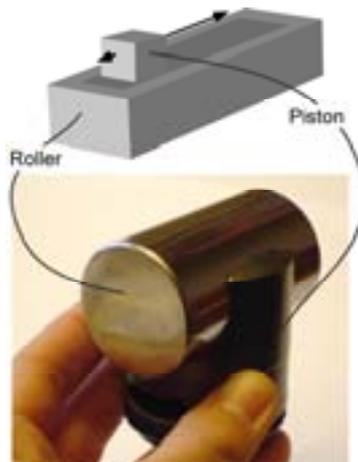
The upper smaller piston part is sliding against the lower roller sample. To ensure a flat parallel contact, the sample holders were designed to self-adjust continuously during the sliding.
